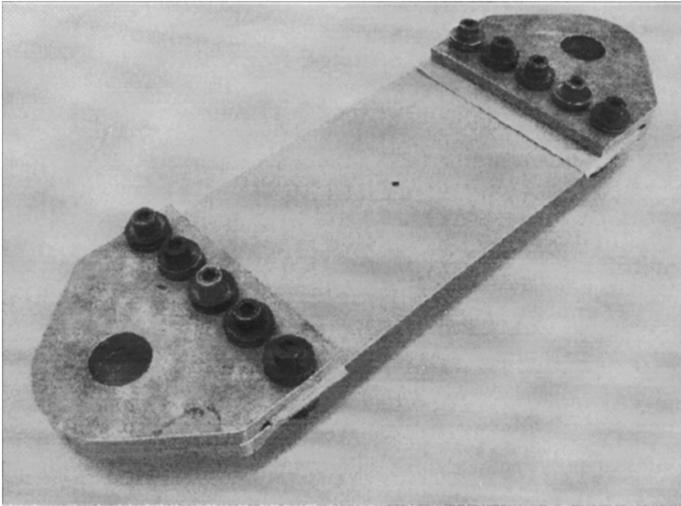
Clamping of a sheet specimen with bolts to steel plates assembled outside the testing machine. Mounting in the machine occurs with a single pin at each end into a clevis.
